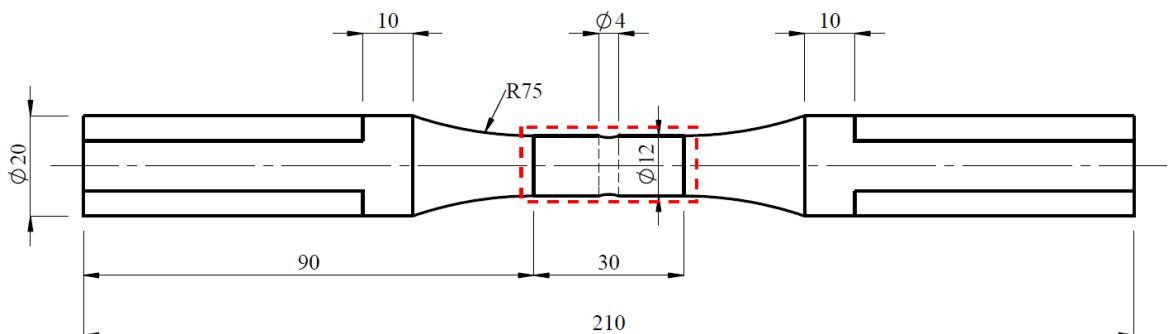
AISI 316 notched cylinder specimen. The dimensions are in millimeters.
